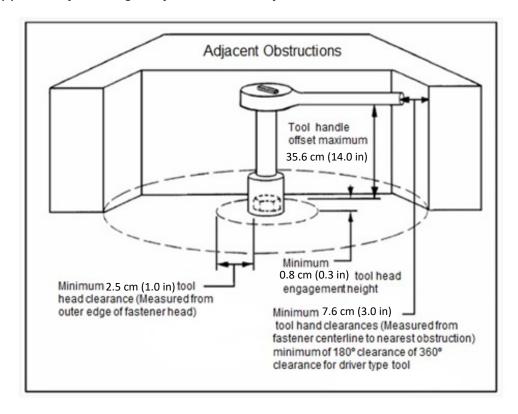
TOOL INTERFACE CLEARANCE
